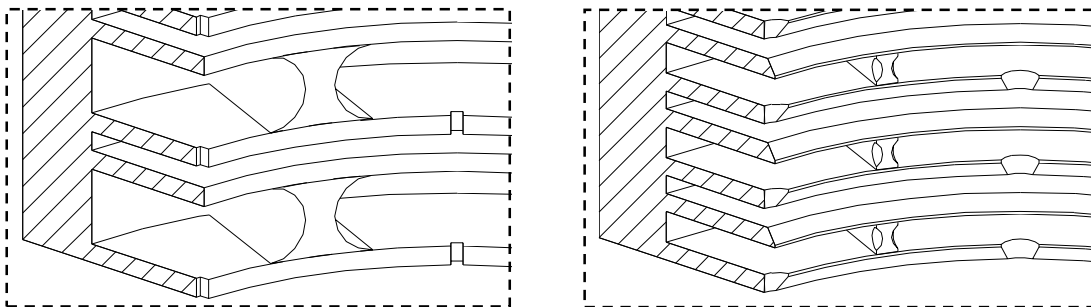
Blade Geometry for Diverging 8-Bladed (left) and 12-Bladed (right) Seals
